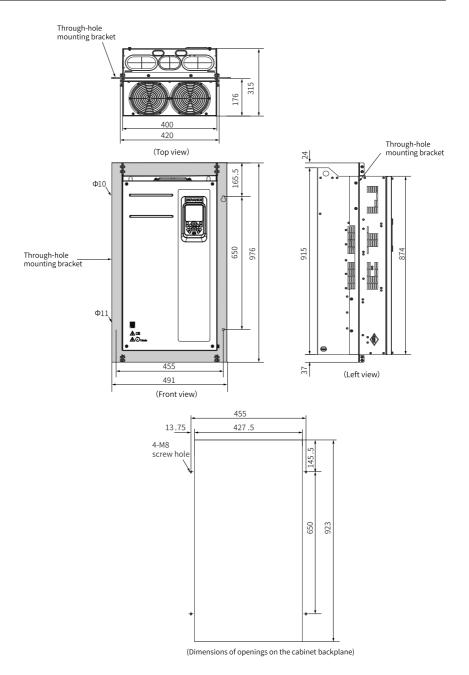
MD500-AZJ-A1T9 through-hole mounting bracket and cut-out dimensions (mm)
